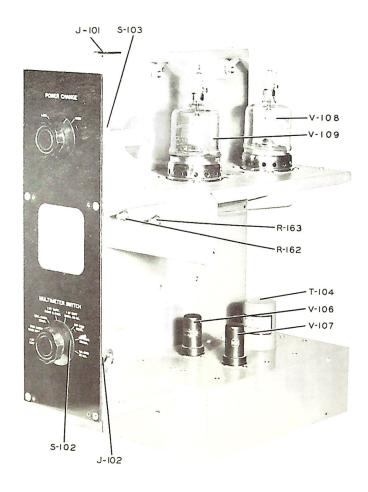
Driver Cabinet, Audio Chassis, Top View
